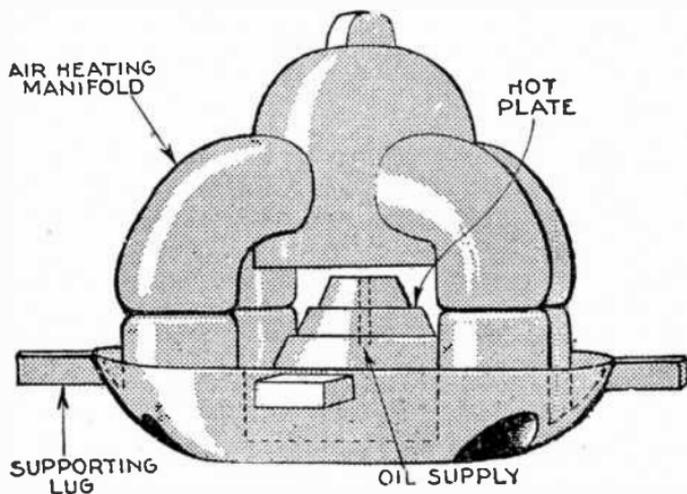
,699.—Casting which constitutes a simple gravity feed, vaporizing type burner
